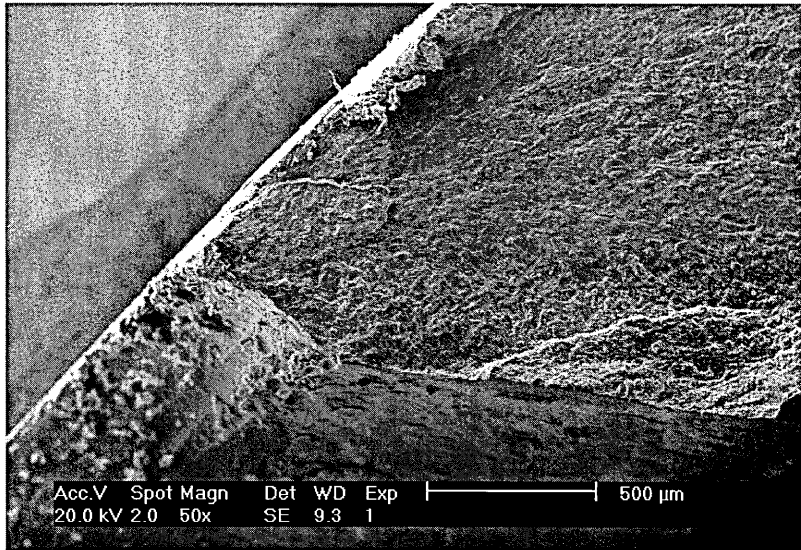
SEM Image of Specimen#21 Fracture Surface
